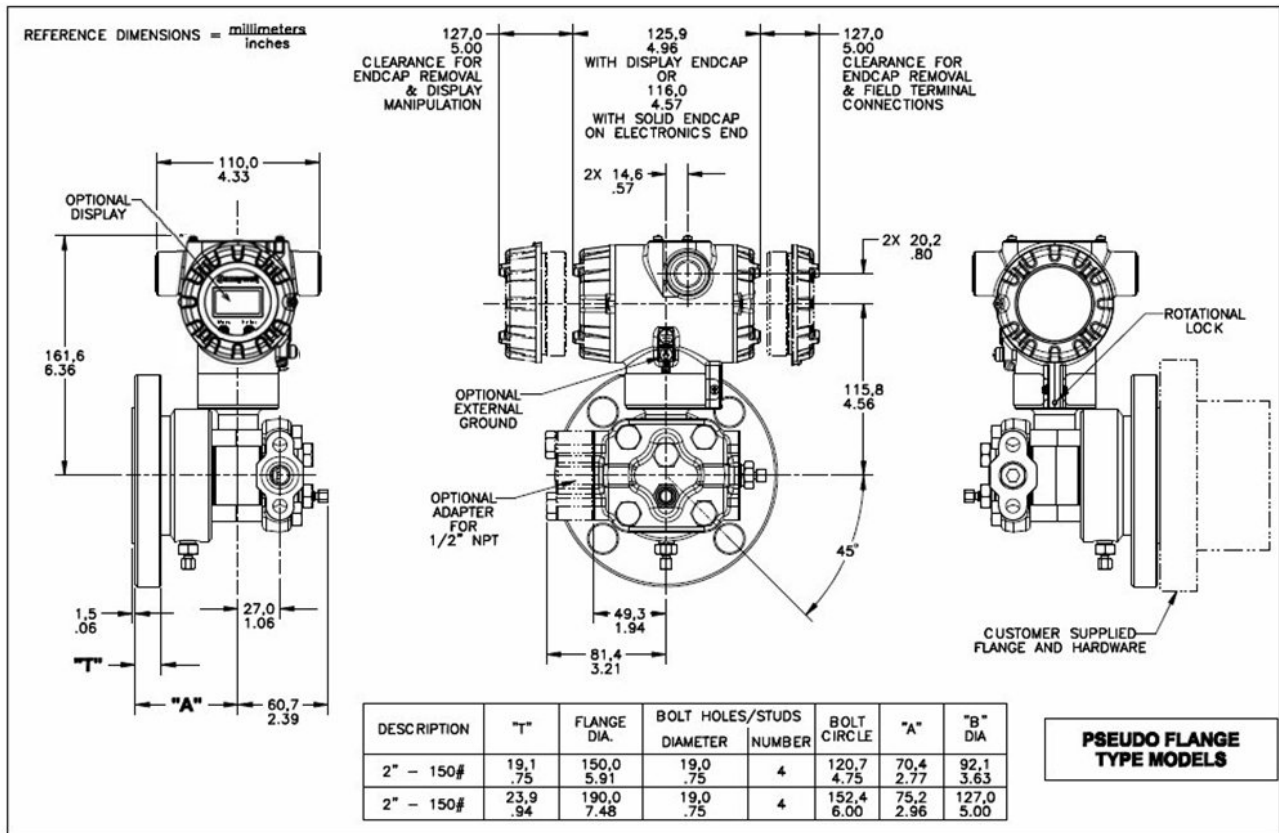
Typical mounting dimensions for pseudo flange type models STF72P and STF73P
